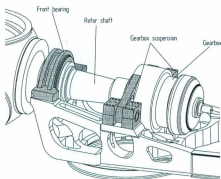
Three Point Suspension of the rotor shaft / Gear box Assembly [53]
